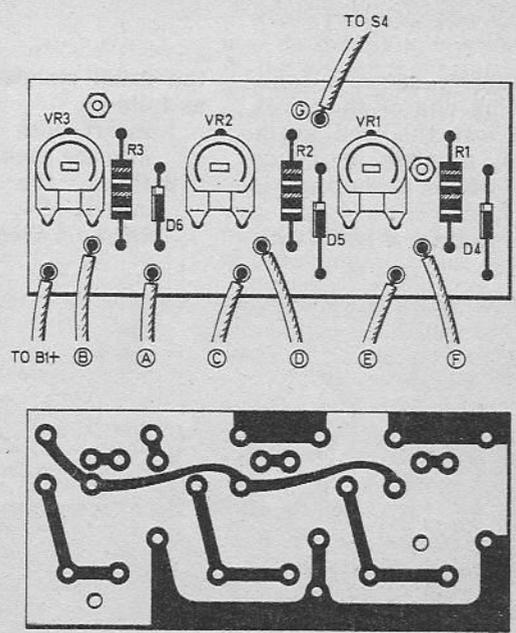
Printed circuit board component layout and the underside of the board showing copper tracks after etching (full size).
